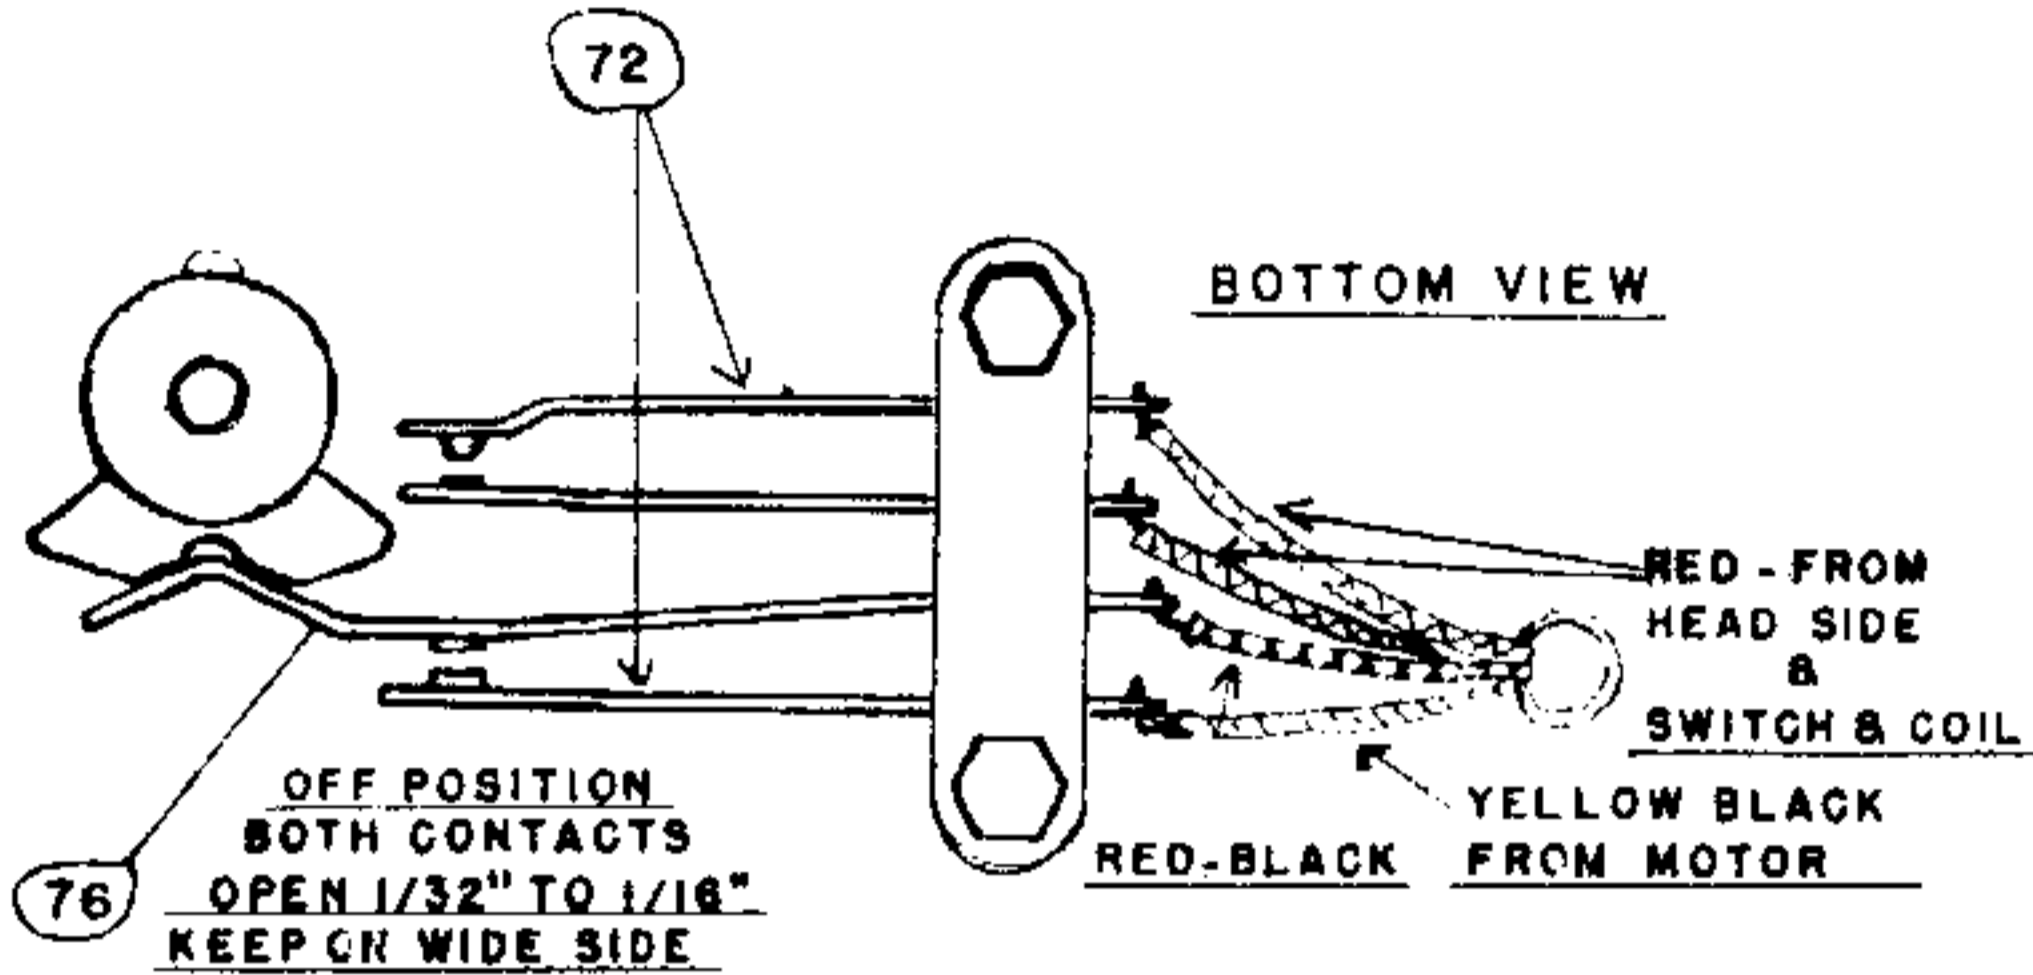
MOTOR CONTROL SWITCH — "OFF" POSITION
